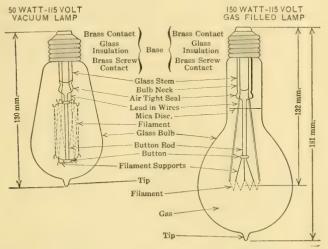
Arrangement of Parts in Vacuum and Gas-filled Lamps.
